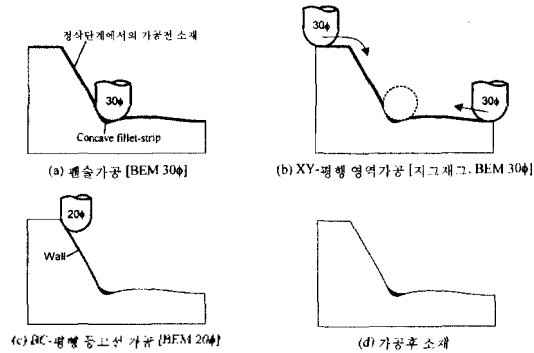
Unit machining operations at finish stage (stamp ing-die).
